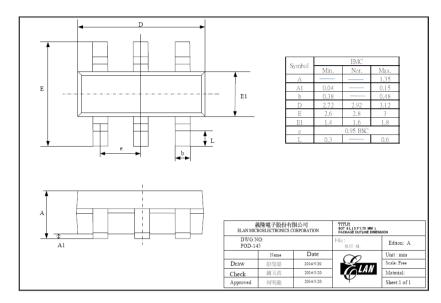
EM78P151 8-Pin SOT23-6 Package Type
